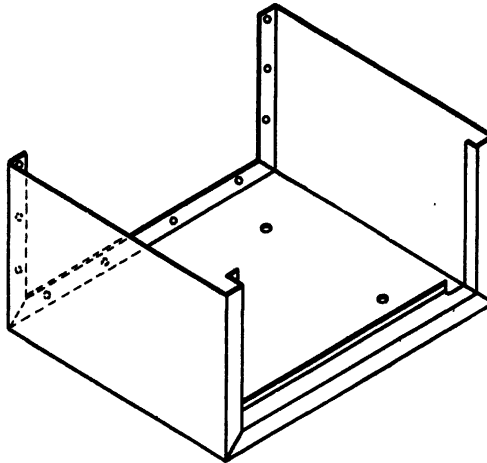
SECTIONAL PERSPECTIVE OF BODY SHOWING BEND CONSTRUCTION
